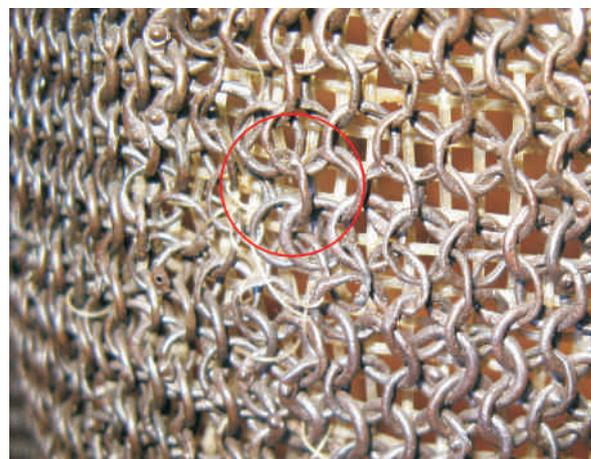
"Pseudo"-riveted rings. *Photo by N. Checksfield.
